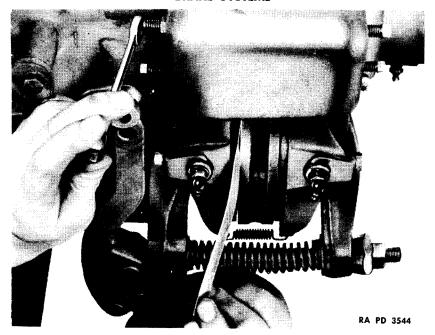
Drive Shaft Brake Front Shoe Adjustment
